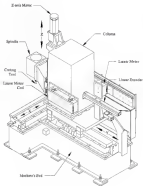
High speed milling machine (HSM) at NIST/JSTEC
